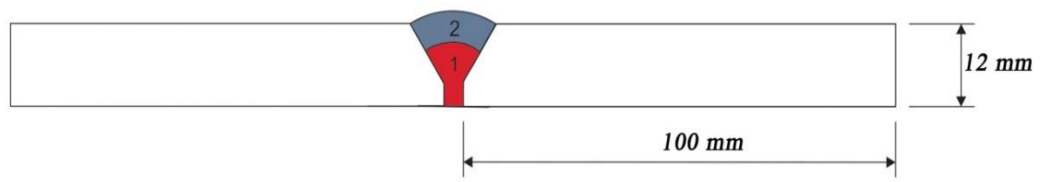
Fabricated single V-shape welding groove butt joint for AISI 1045 steel, with two successive passes.
